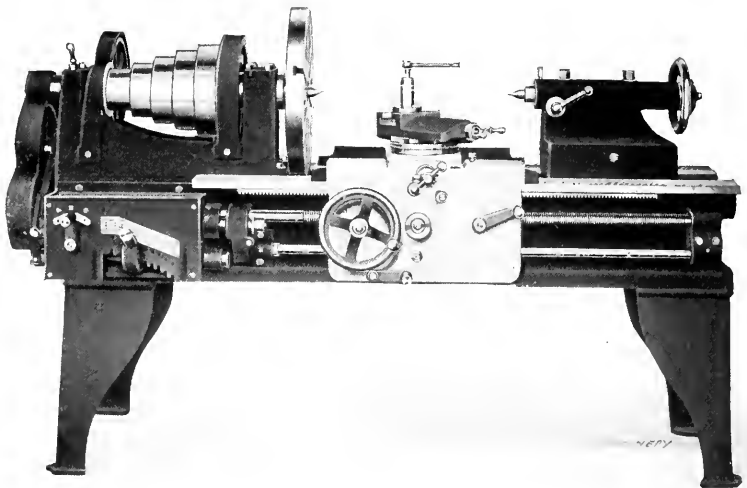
Rahn-Larmon 16-inch Lathe with Quick Change Gear
